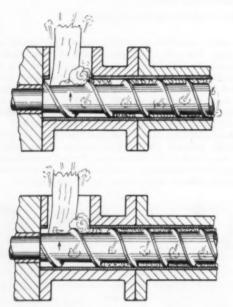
CUTAWAY VIEW SHOWING OPERATION OF ROTATING SCREW
